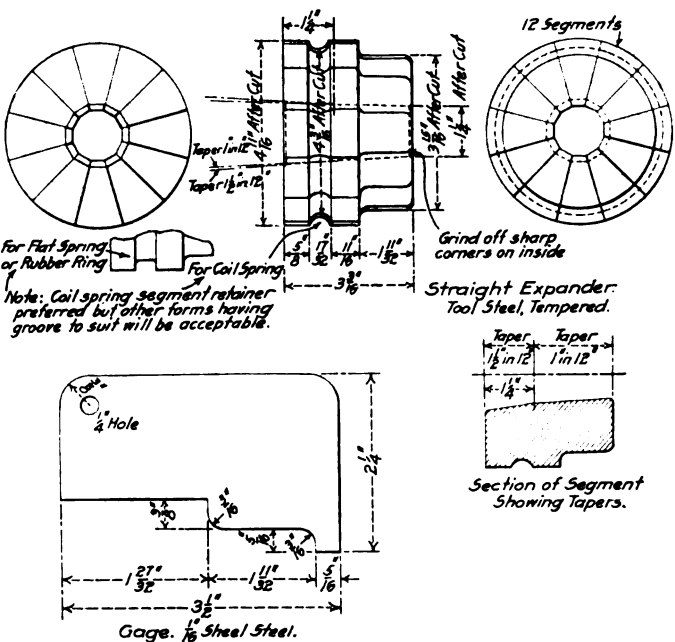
Straight Sectional Expander for Copper Ferrules and Superheater Flues.
